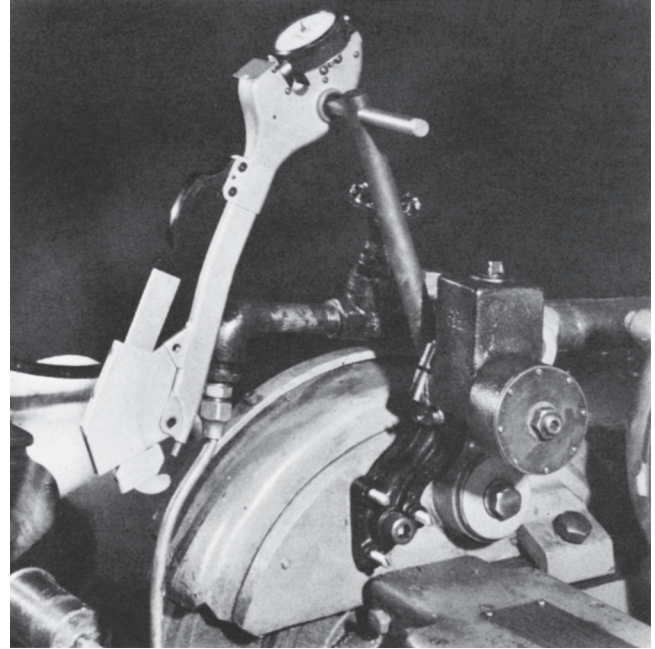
Dial indicator in process grinding gage in retracted position (Courtesy Mahr Federal Inc.).
